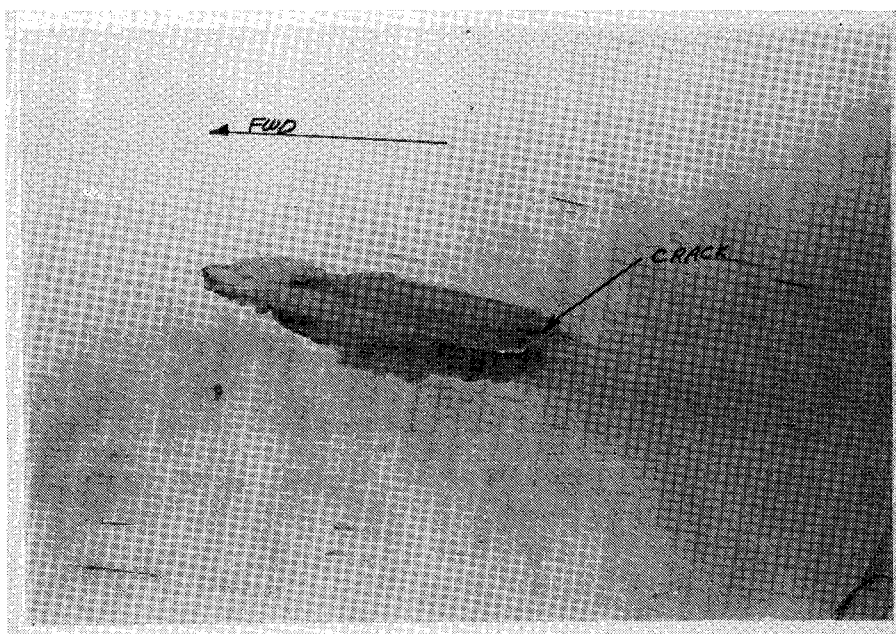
Crack - Exterior Fairing Surfaces - 1975 Inspection
